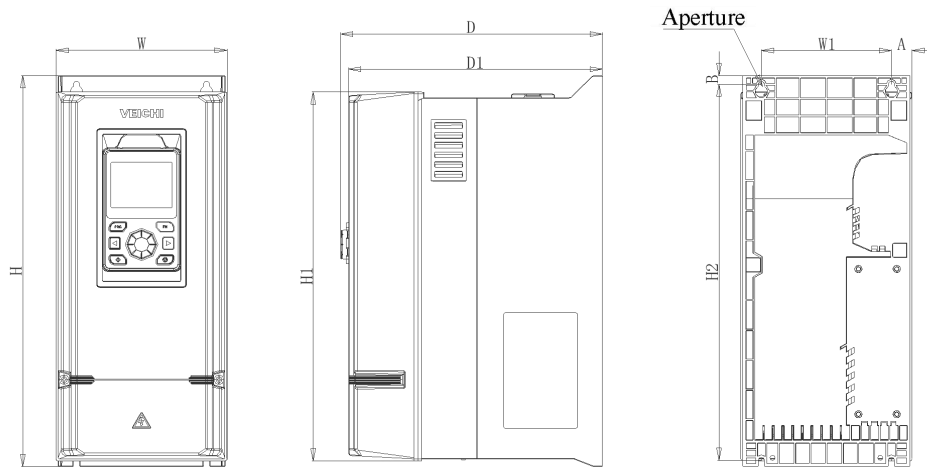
V1~V3 Overall Dimensions and Hole Size
